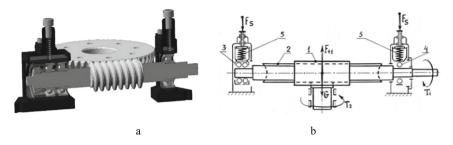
Antibacklash worm gearing: a - 3D model; b - design scheme.
